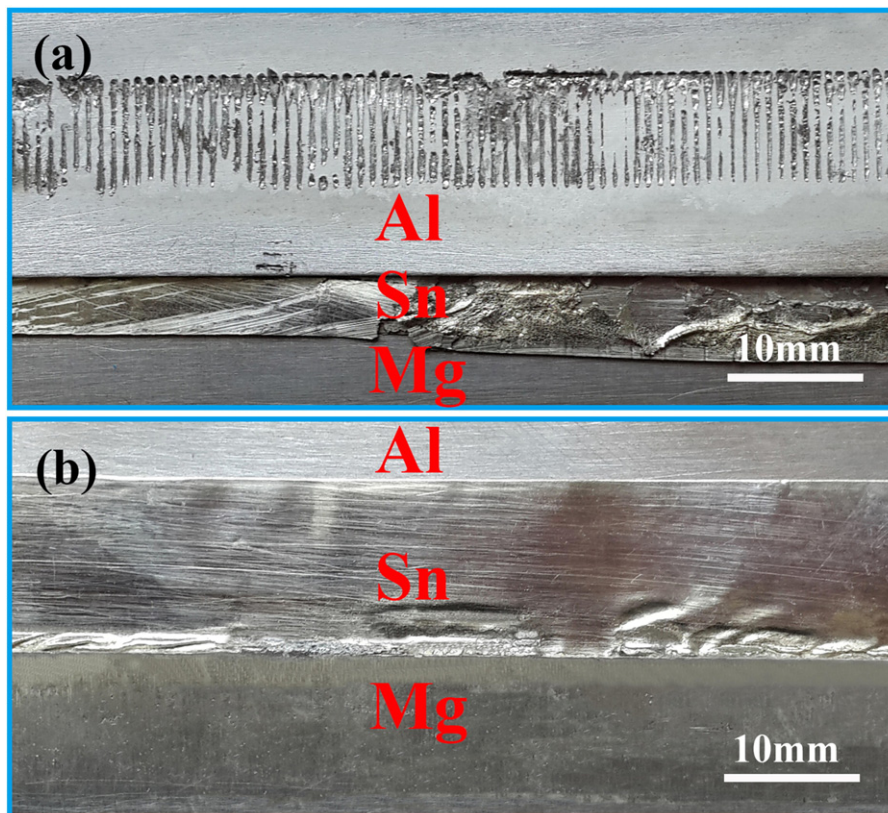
Weld appearance of the joint produced at GTAW current of 35 A: (a) front; (b) back.
